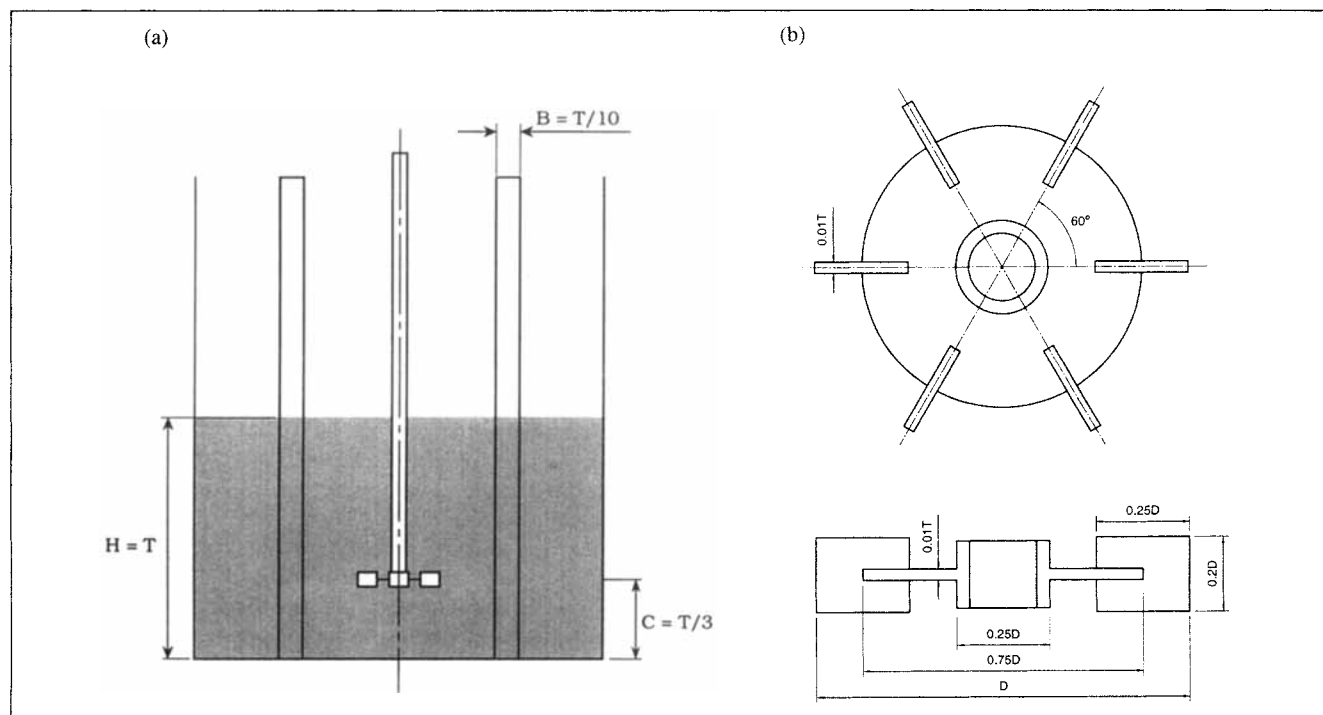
(a) Stirred vessel configuration; (b) impeller geometry.
